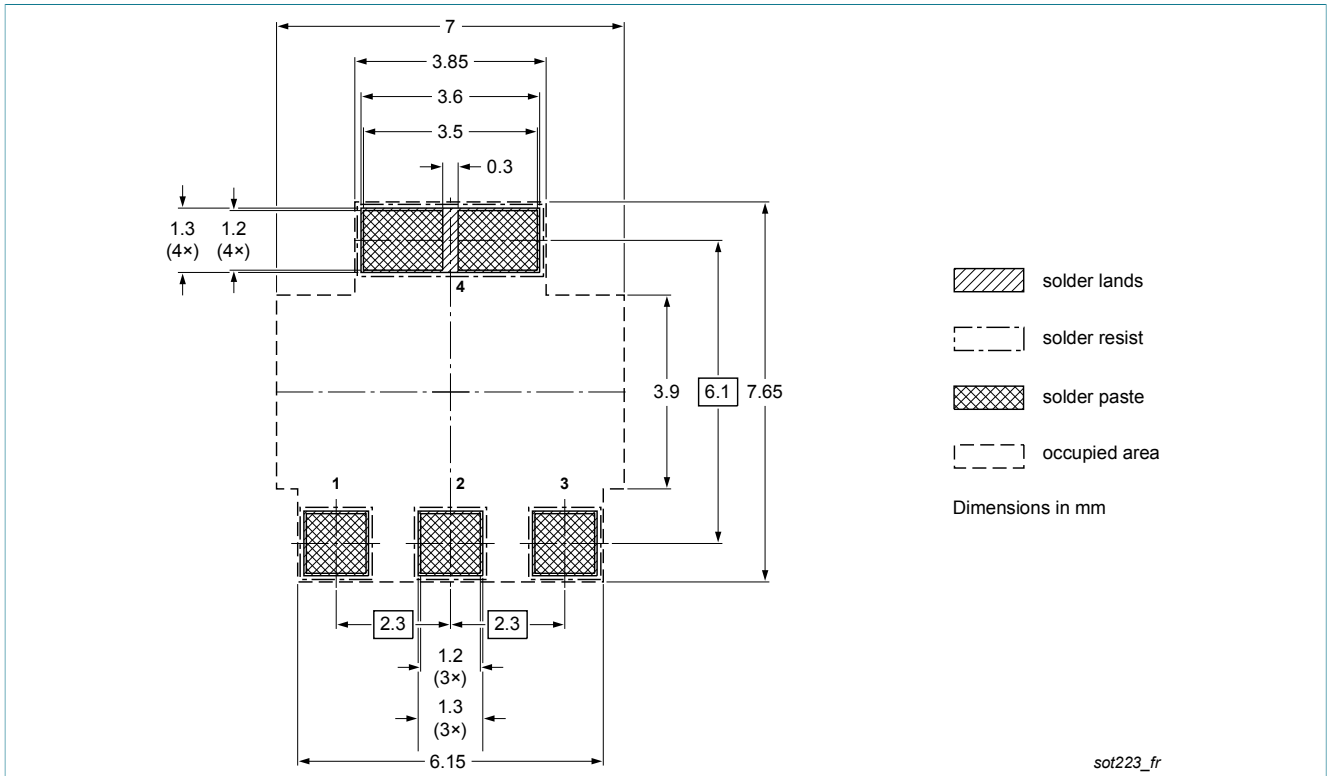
Reflow soldering footprint for SC-73 (SOT223)
